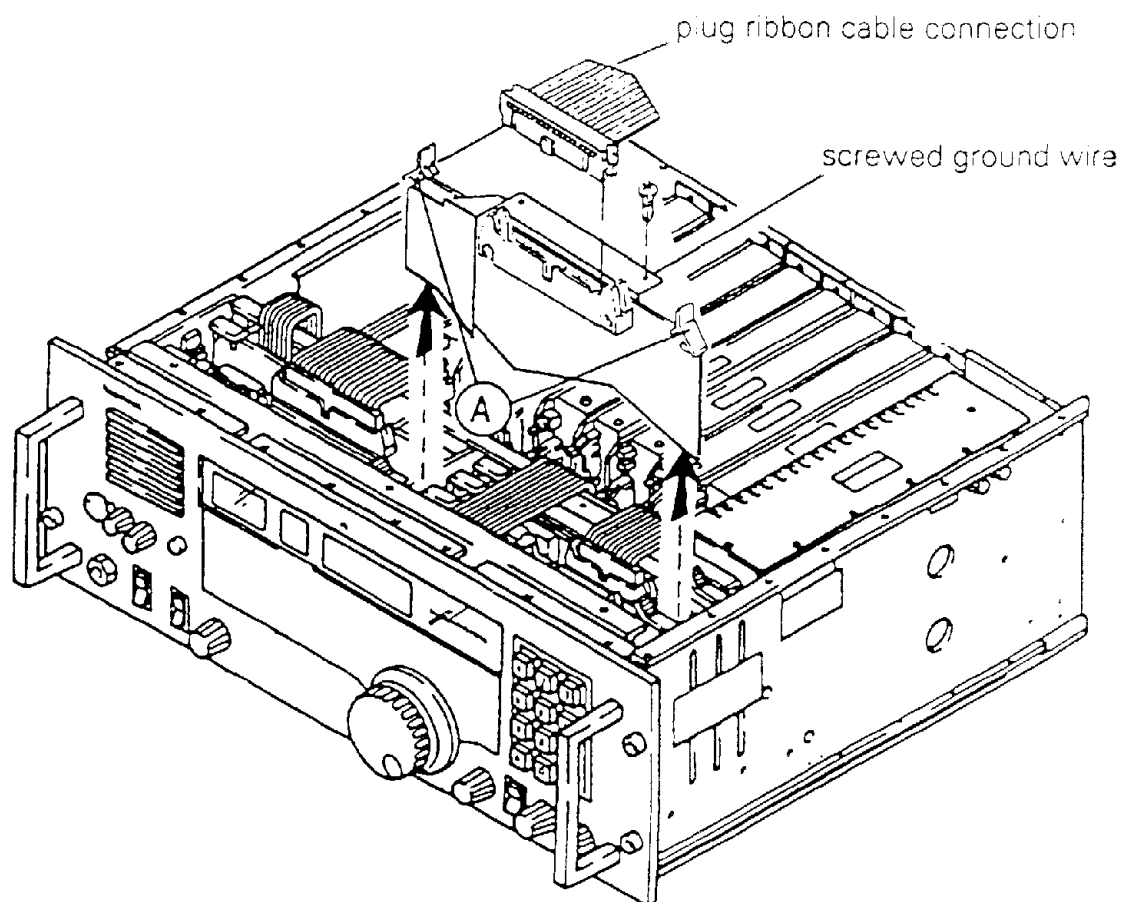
Printed Circuit Board (PCB) Removal in the Control Part
